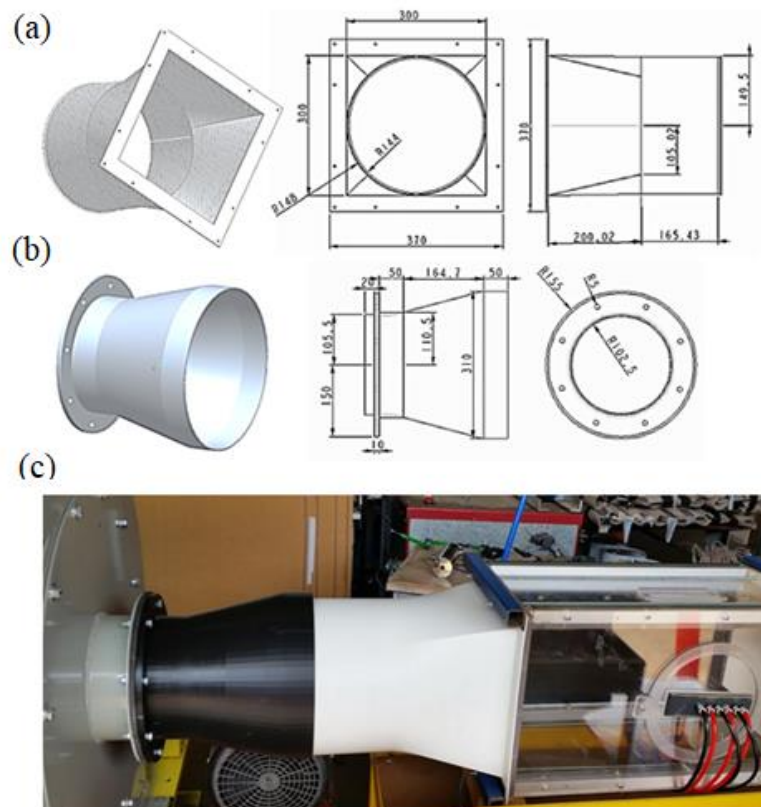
(a) & (b) Design parts of a wind tunnel transition section; (c) their manufactured parts (All dimensions are in mm)
